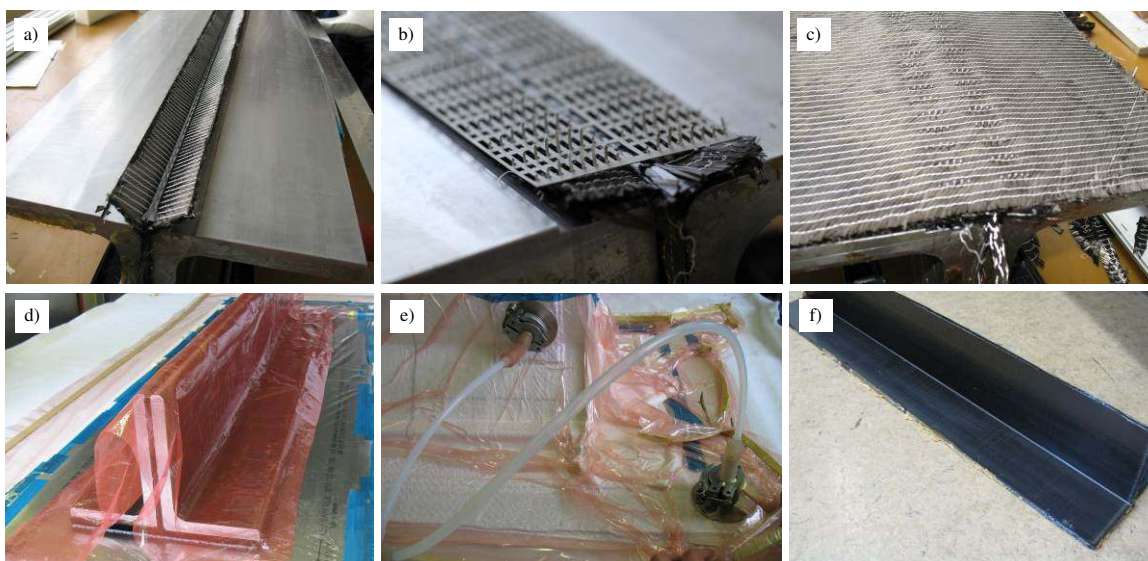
Manufacturing steps of composite T-joints samples: a) placement and cutting of flange plies, b) placement of fillet and metal pin sheet, c) placement of skin laminate, d) preparation for resin injection, e) vacuum-assisted resin injection process, f) final part for eight T-joint samples
